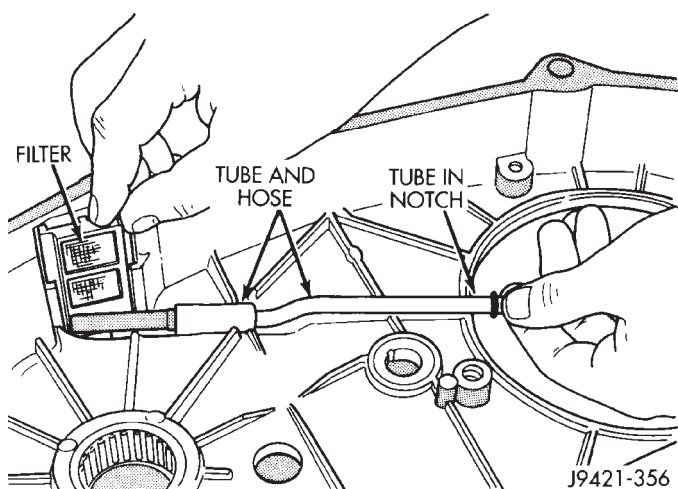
Oil Pickup Tube And Filter Position In Rear Case
